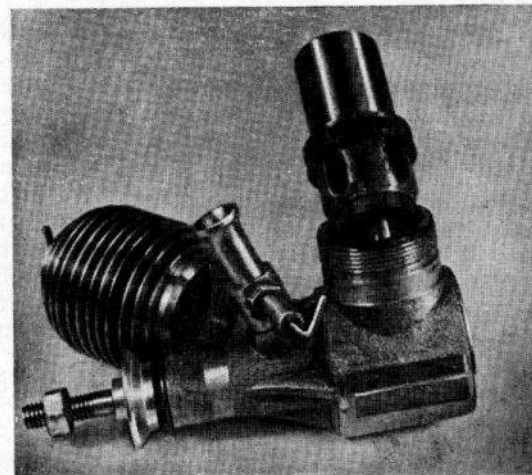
DETAIL OF THE E.D. RACER Diesel will help to identify component parts described in these chapters.
